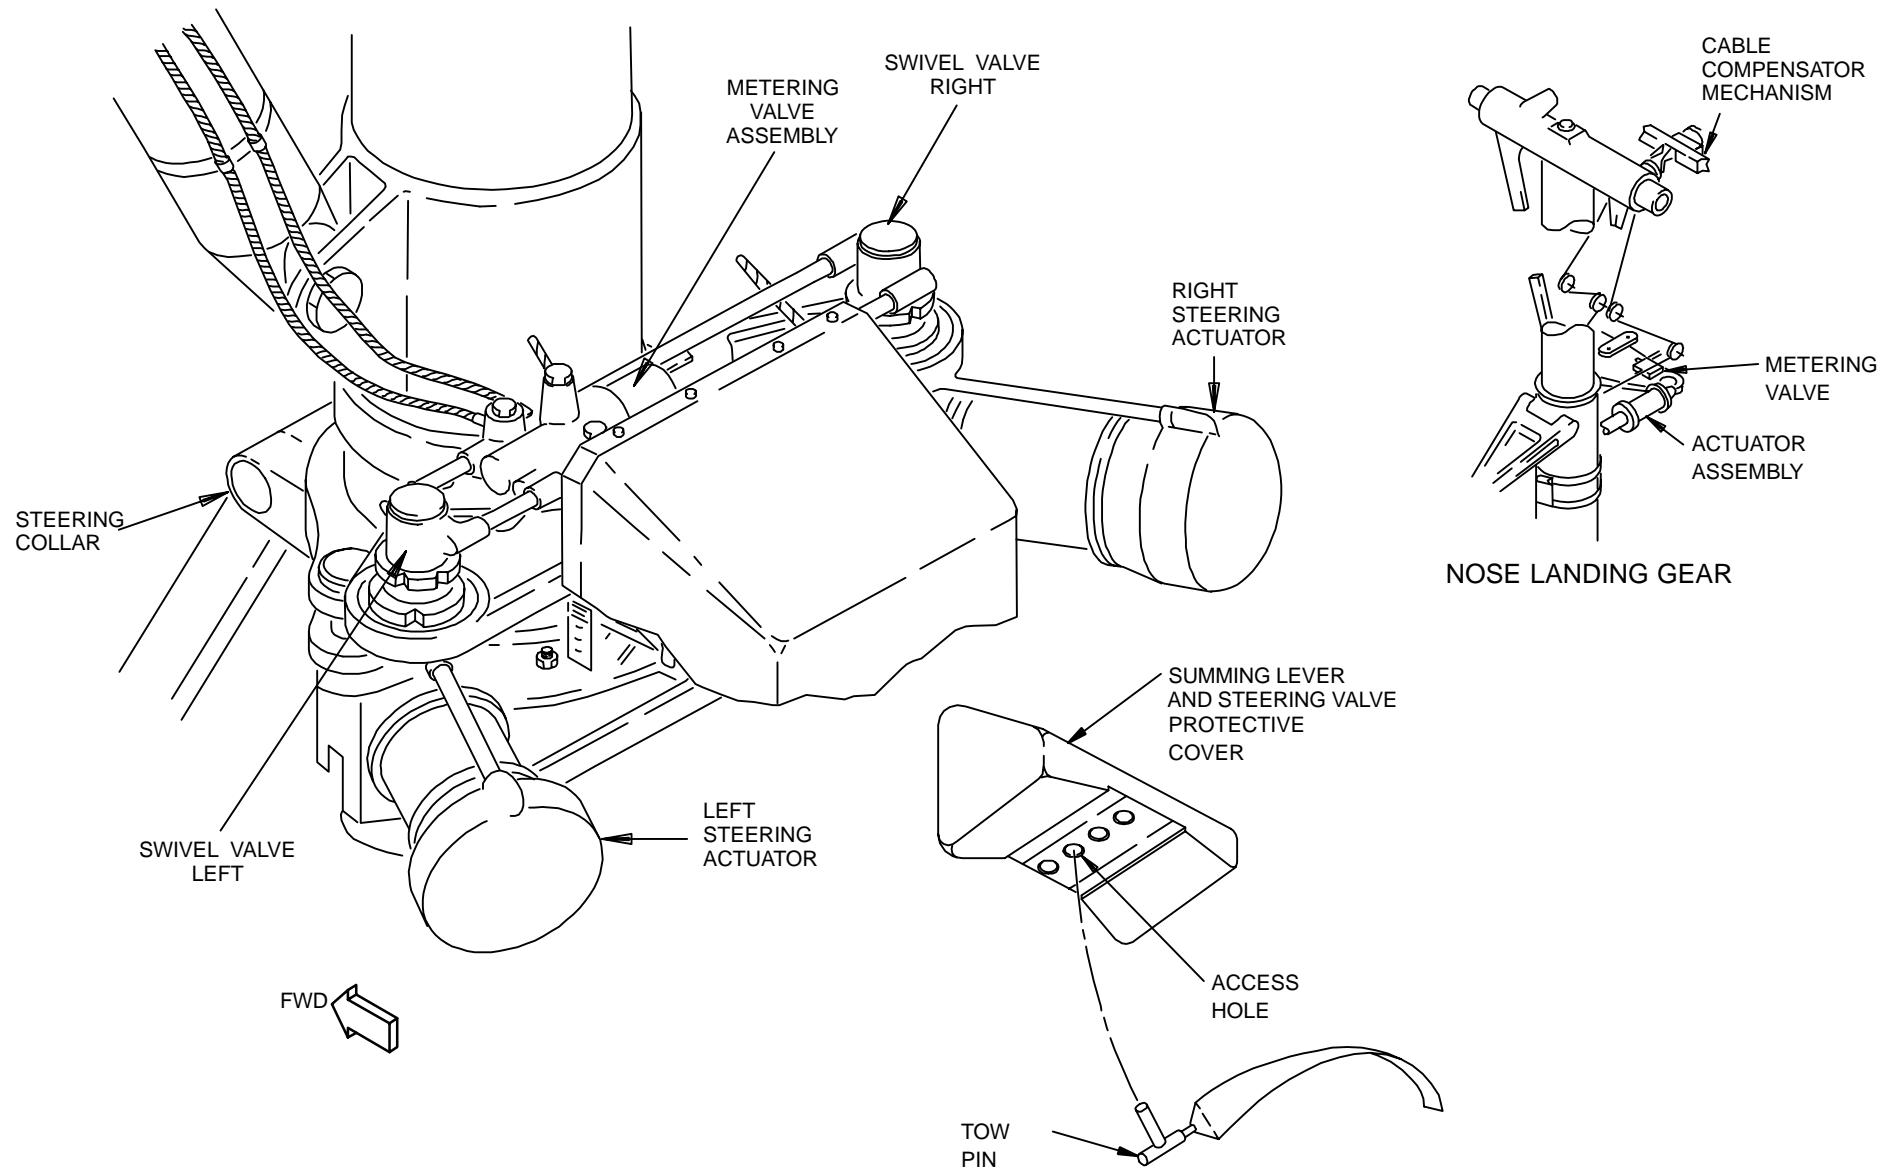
NOSE GEAR STEERING ACTUATOR ASSEMBLY
